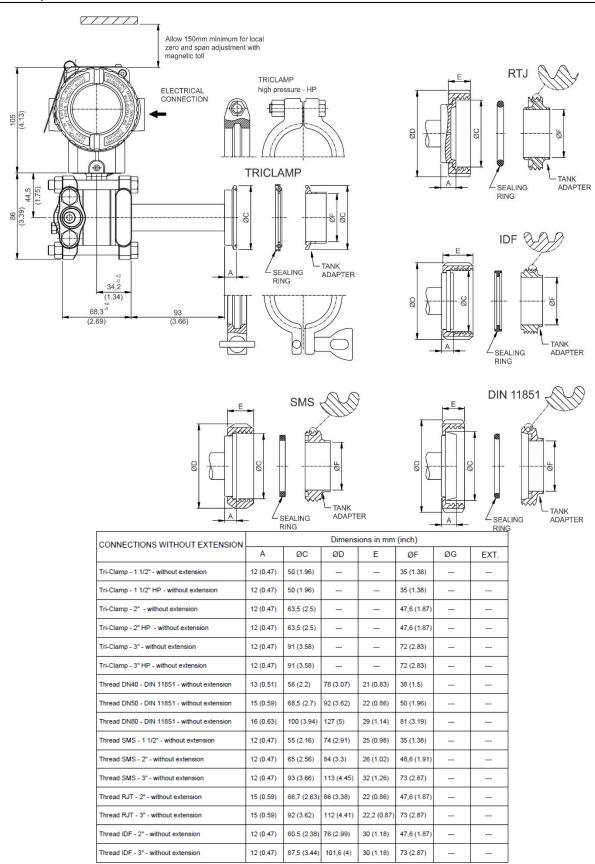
(e) – Dimensional Drawing and Mounting Position for the LD400 HART® – Sanitary Transmitter without Extension
